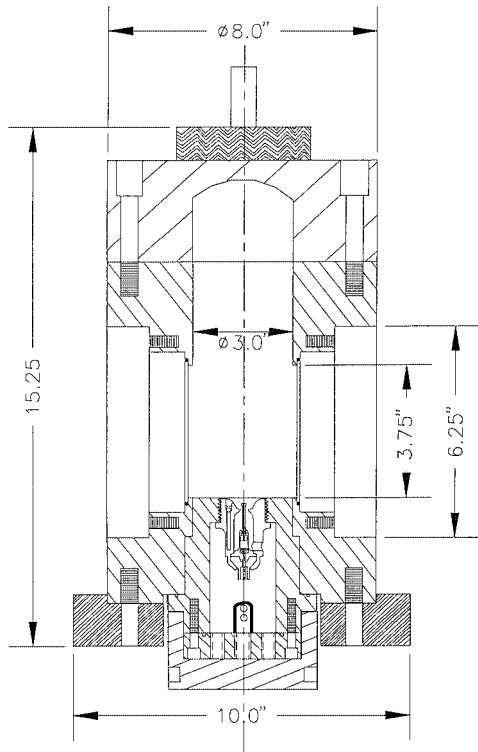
Assembly drawing of high-pressure combustion chamber.
